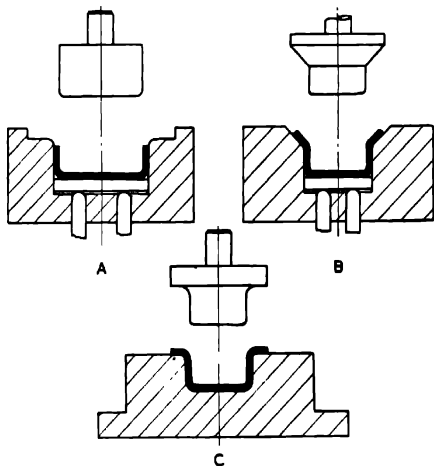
Single-action re-drawing to produce flanged shell, A and B.
